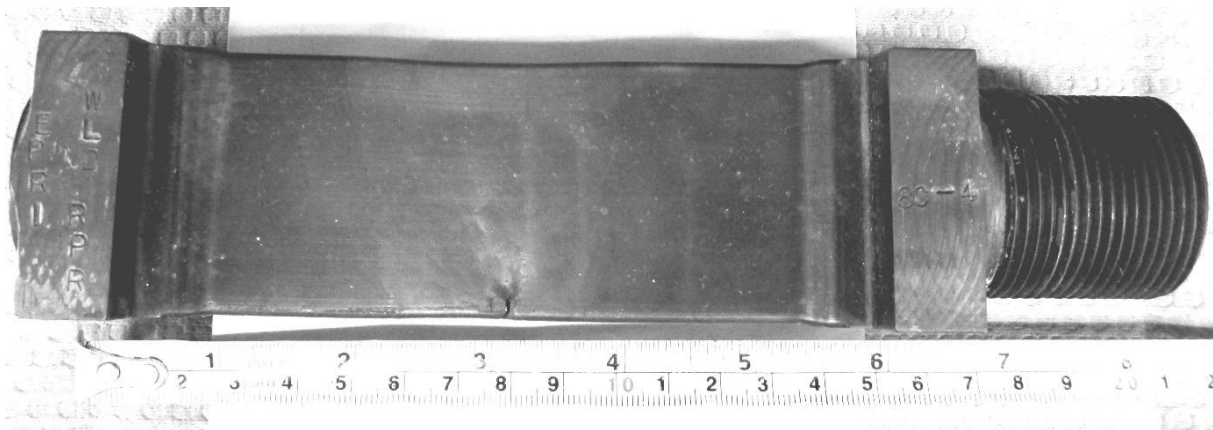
Example of a weld metal dominated failure (sample 8C-4)
